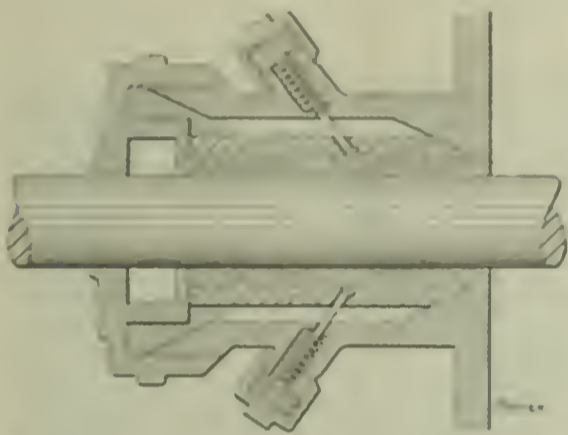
SECTIONAL VIEW OF THE SHORT STUFFING BOX
